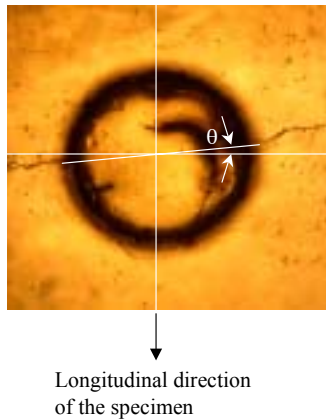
Typical fatigue crack initiated around the hole of the thin-walled tubular specimen under cyclic axial-torsional loading.
